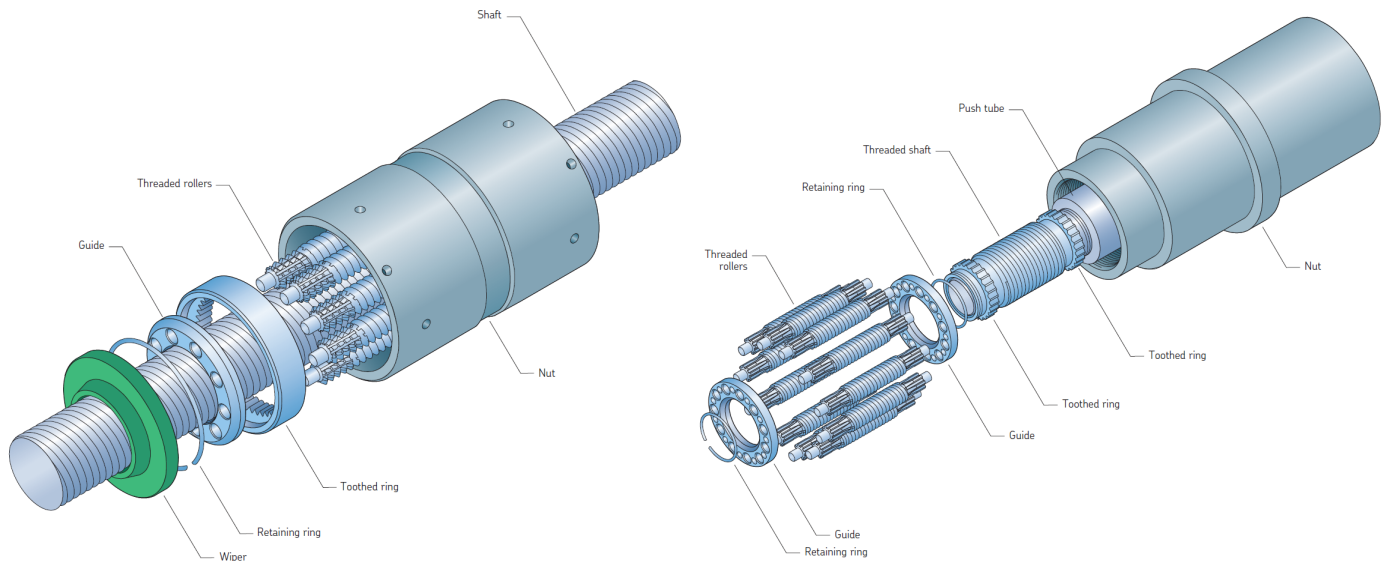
Planetary roller screw mechanism [SKF, 2014]: (left) standard, (right) inverted
